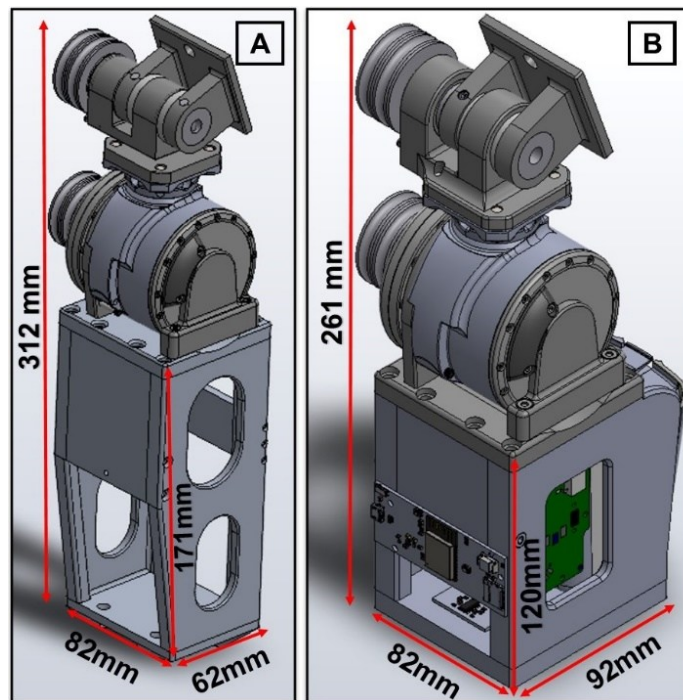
CAD rendering and dimensional differences between first prototype (A) and the final prototype (B).
